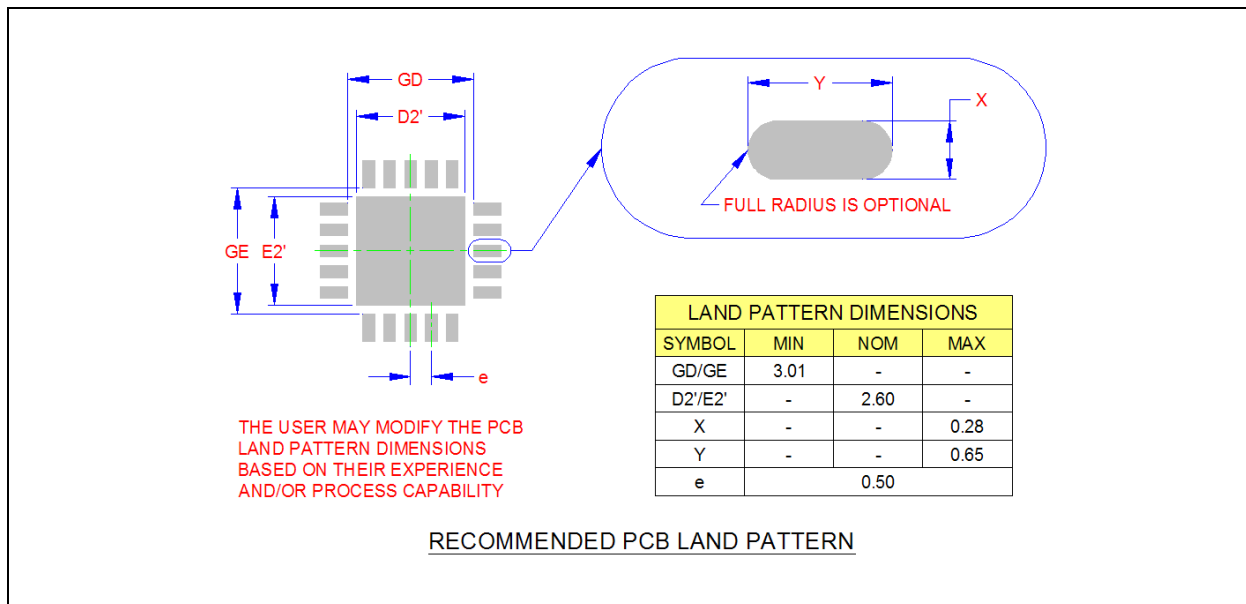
20-Pin QFN 4mm x 4mm Package Dimensions
